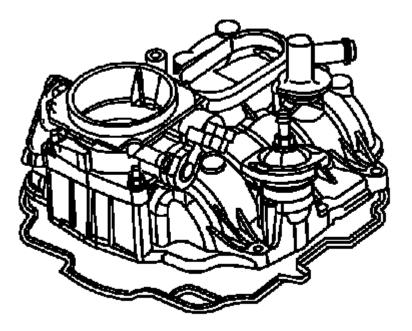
View Of Intake Manifold Upper Gasket Courtesy of GENERAL MOTORS CORP.
